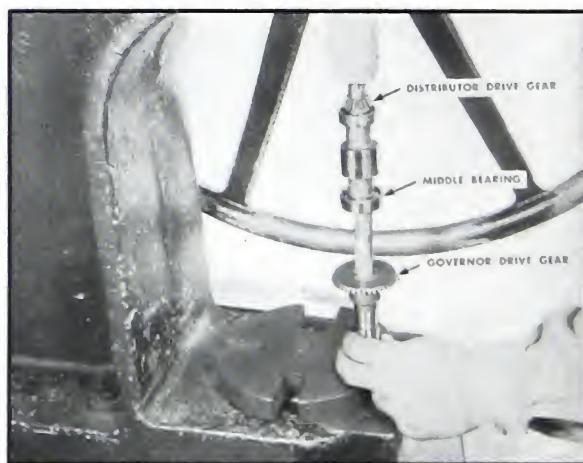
Assembling governor gear pump drive gear to camshaft
